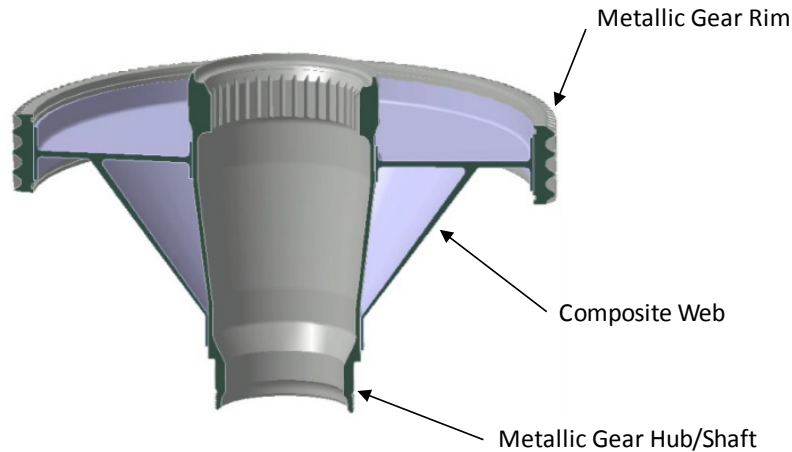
Selected Gear Configuration – Hybrid Bull Gear
